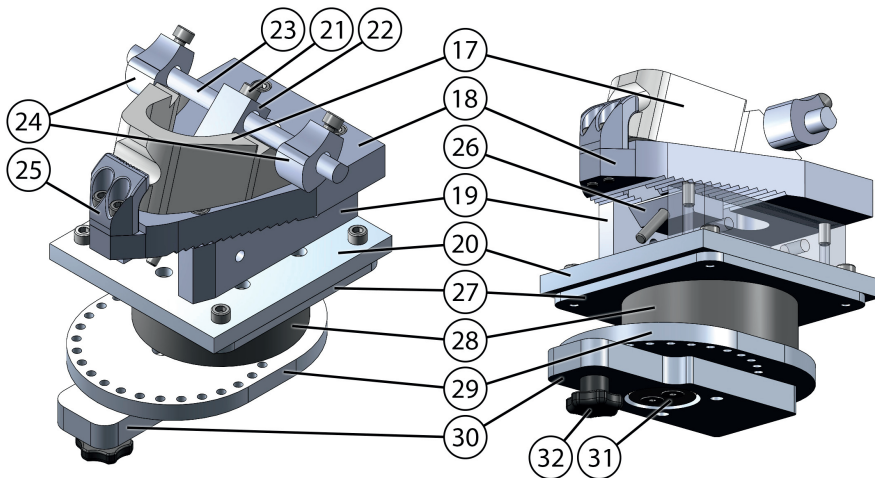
Holding device for lower jaw: (17) lower jaw, (18) surface plate, (19) supporting plate, (20) ground plate, (21) clamping bolt, (22) sliding block, (23) clamp axis, (24) side blocks, (25) front block, (26) clamping nut, (27) top plate of sensor build-up, (28) force-torque sensor, (29) rotation plate, (30) bottom plate, (31) rotation axis, (32) locking bolt
